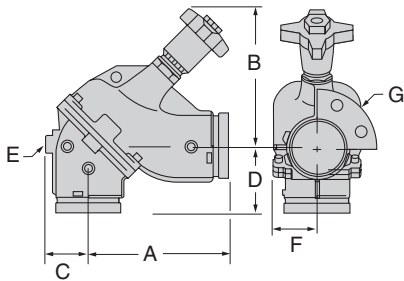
FIGURE GBV-A GROOVED-END ANGLE BALANCING VALVES
